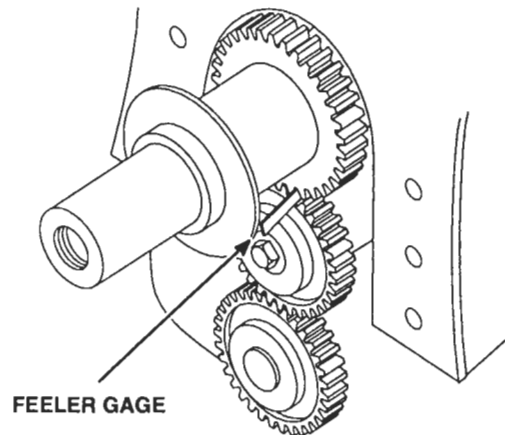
Measuring the Clearance Between the Oil Pump Drive Gear Teeth
